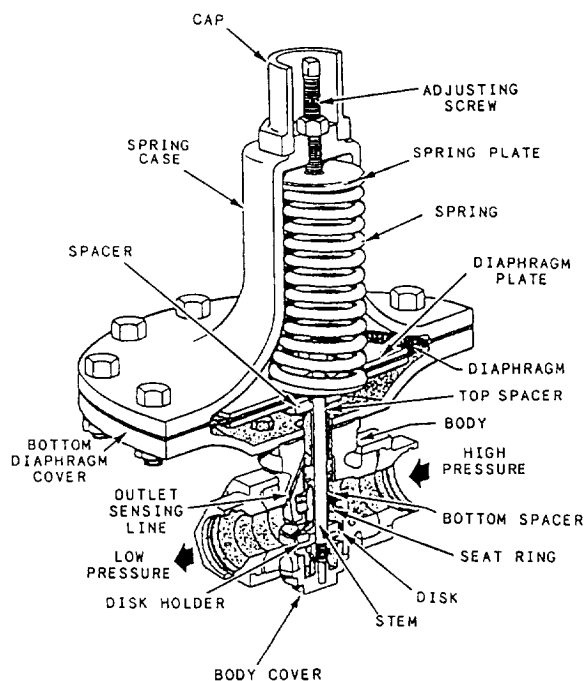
Pressure-reducing (spring-loaded) valve.
